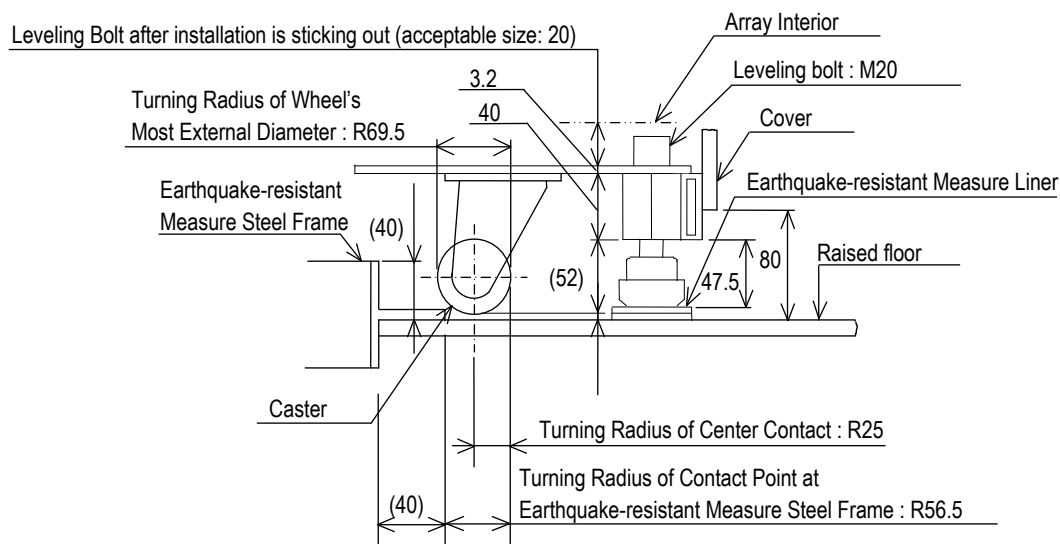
Cross-sectional View of Floor of A-6516-RK40 Rack Frame
